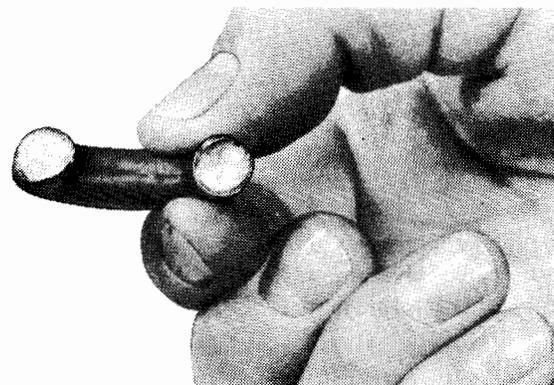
Ball Return Guides Plugged with Petroleum Jelly
